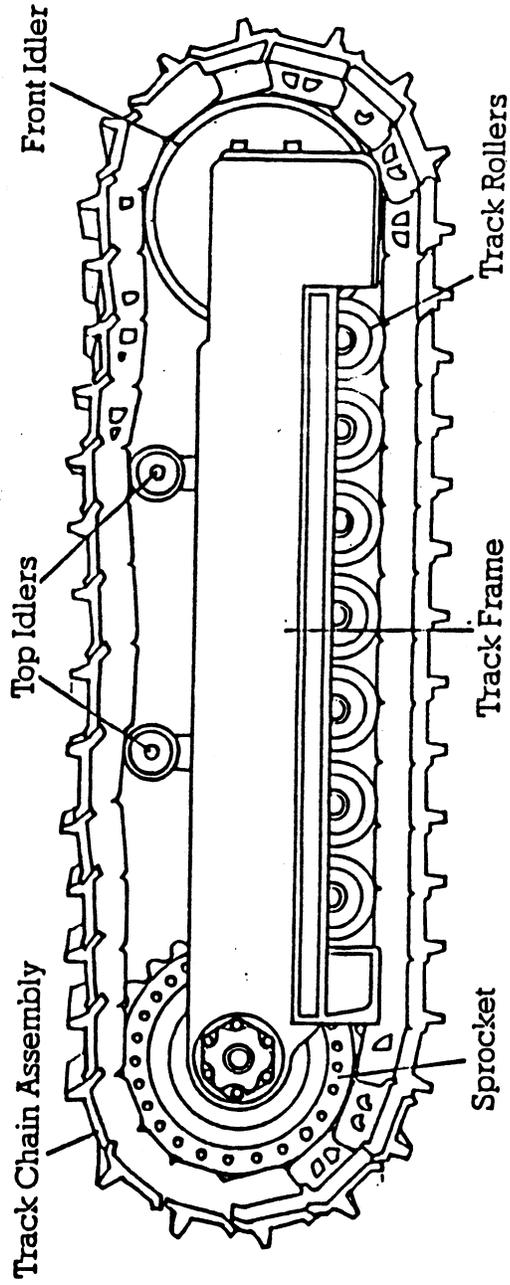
(above).--Undercarriage of a crawler-mounted machine
